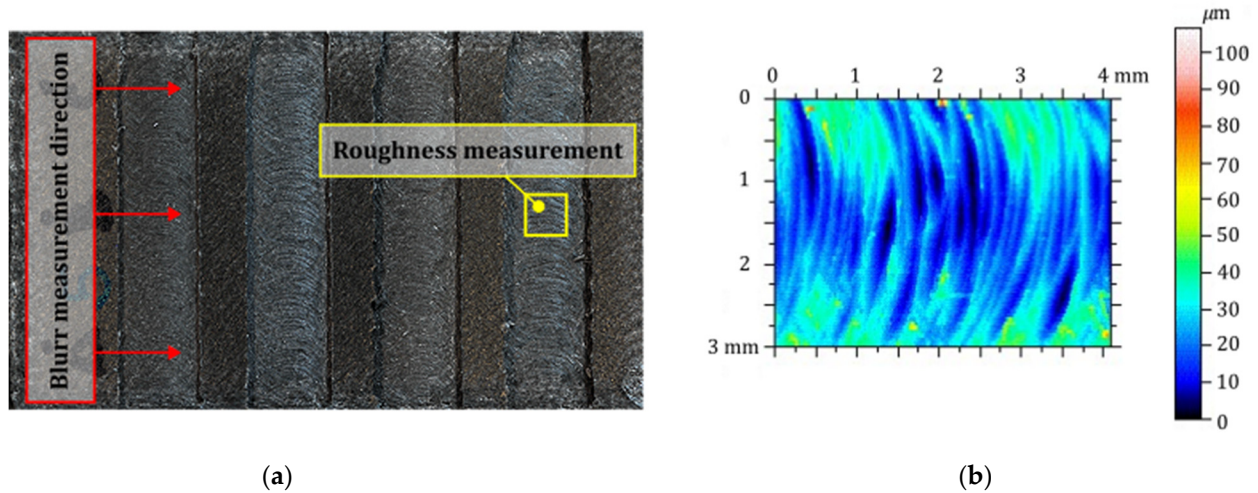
(a) Machined sample showing the three measured burr directions, (b) example measurement of surface roughness S_a (in μm).
